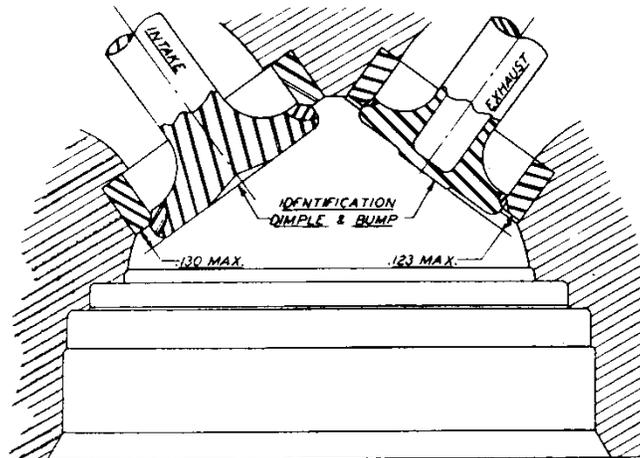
PROPER VALVE SEATING IN NEW CYLINDER HEAD
